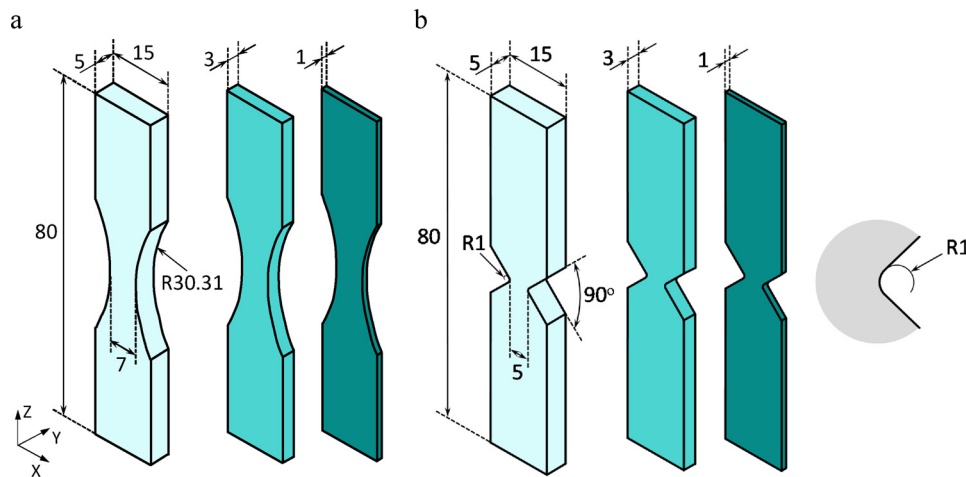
Geometrical dimensions of the test specimens, (a) unnotched specimens, (b) notched specimens (unit: mm).
